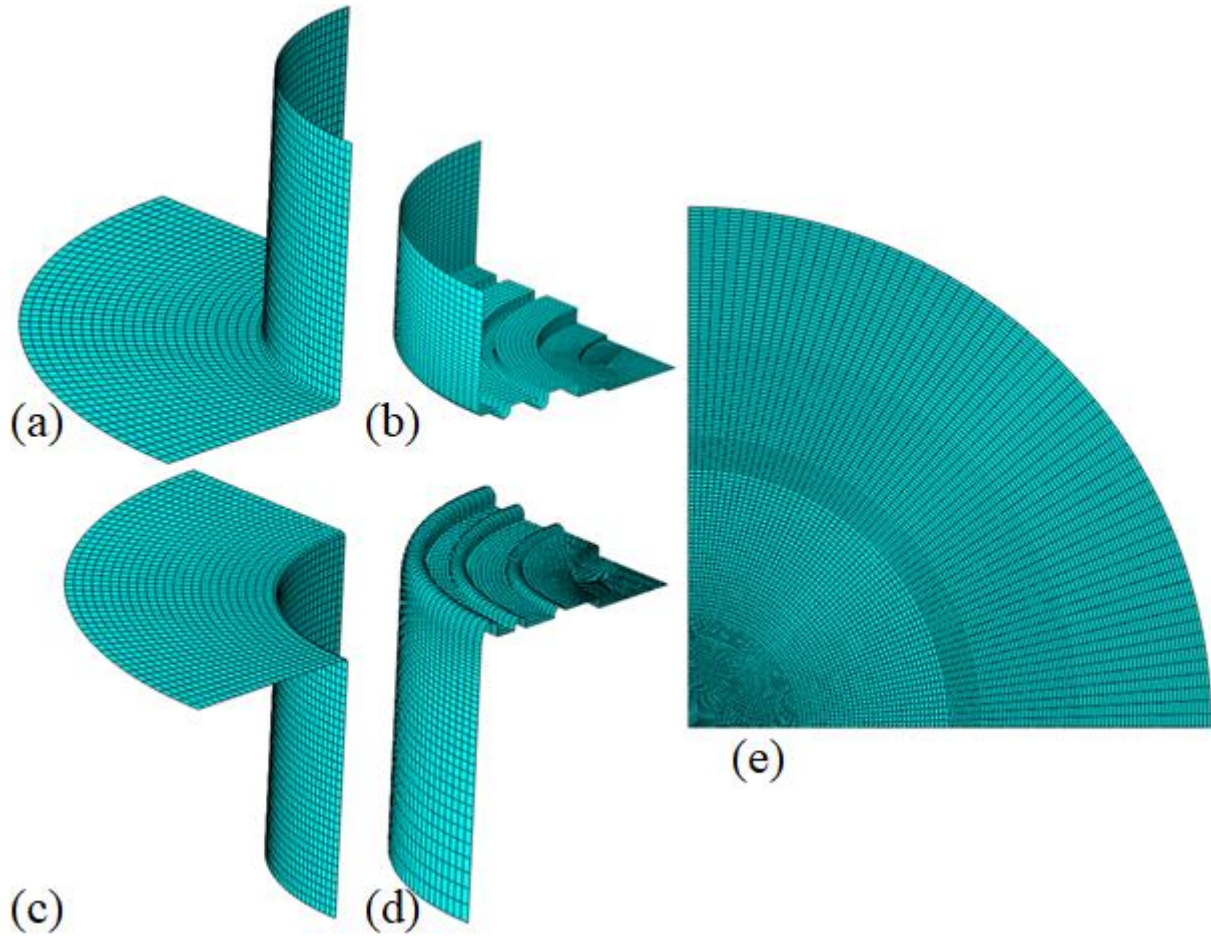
Finite element mesh: (a) Upper blank-holder; (b) Counter-punch; (c) Lower blank-holder; (d) Punch; (e) Blank.
